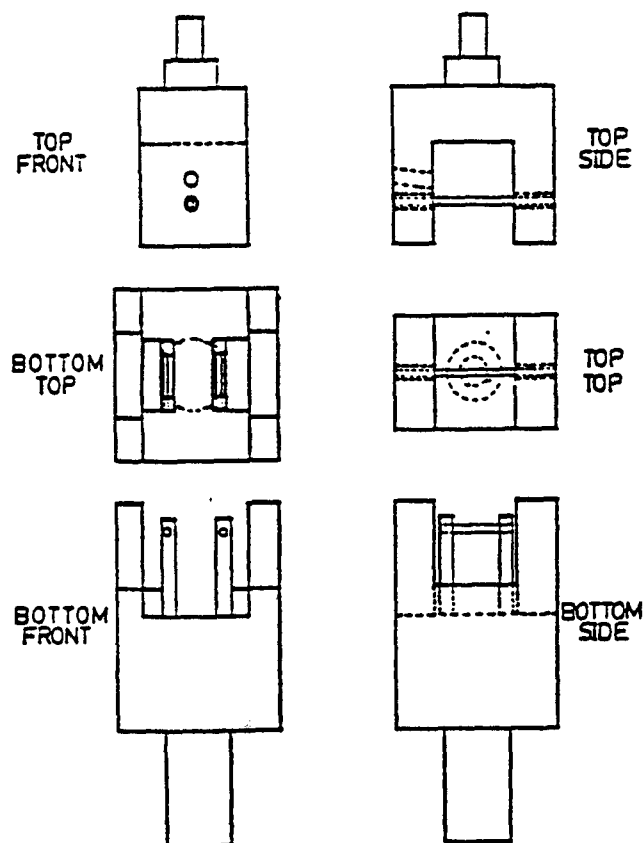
Schematic of the three-point bend fixture used for determining both fracture toughness and flexural modulus.
